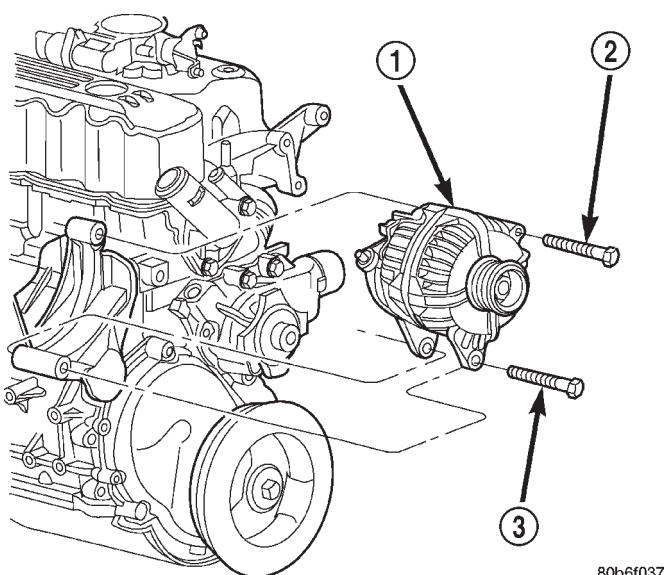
Remove/Install Generator—4.0L 6-Cylinder Engine
